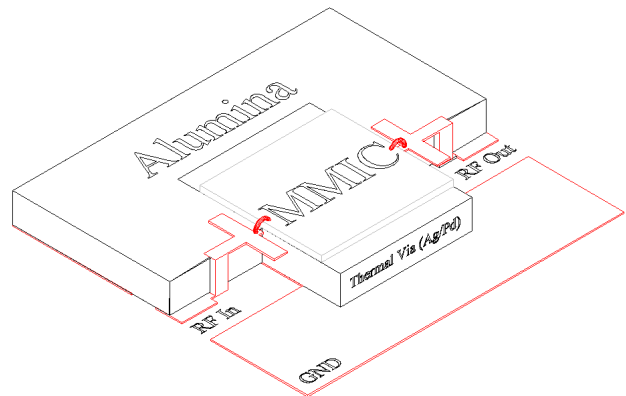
3D view of finished package with MMIC assembly. The MMIC sits on a Pd/Ag heat sink.
